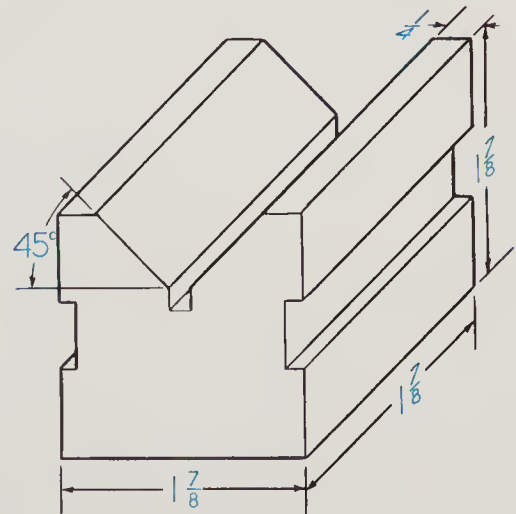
Dimensions on a cavalier oblique drawing.
